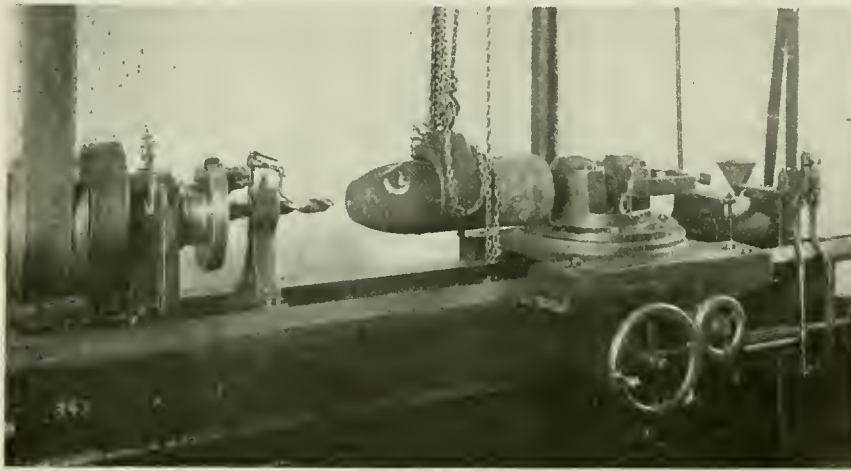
DRILLING SHELL NOSE ON "PETRIE" LATHE.
